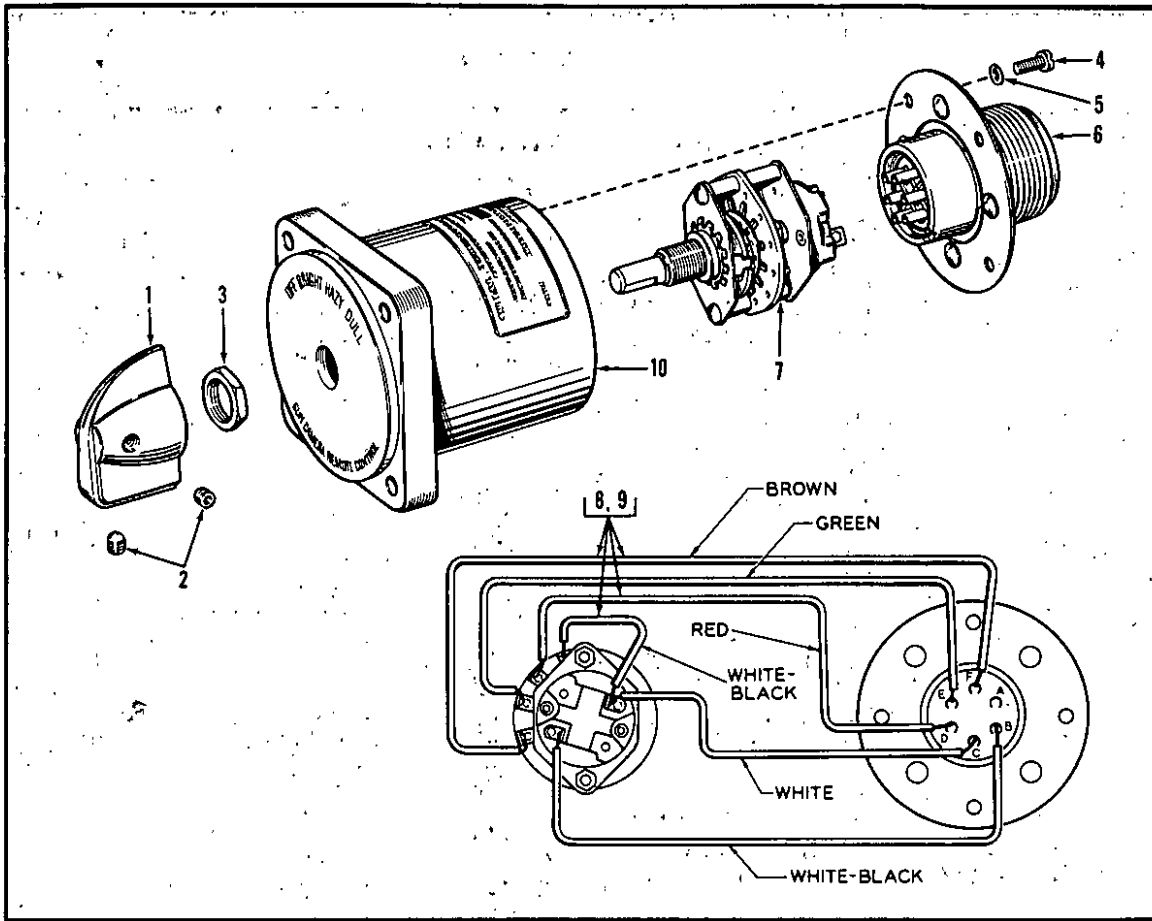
Exploded View of Remote Shutter Control Box Assembly
